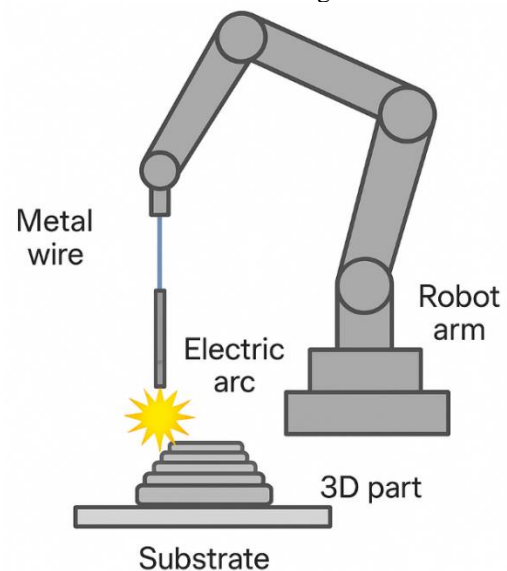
Schematic illustration of a WAAM system with a robotic arm that guides the welding torch that melts metal wire, makes a layer on the substrate, and forms 3D deposition
